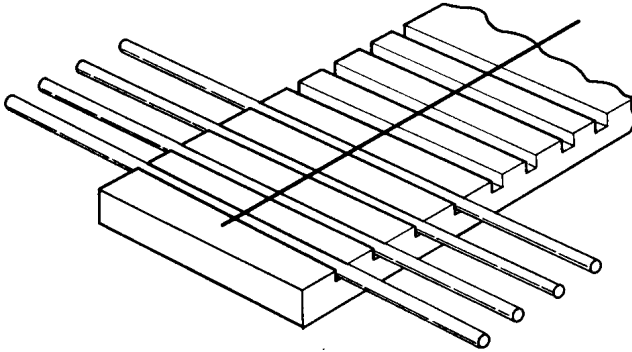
The jig devised by C. E. Briggs to aid in the assembly of the backbone and crosspiece structure.
